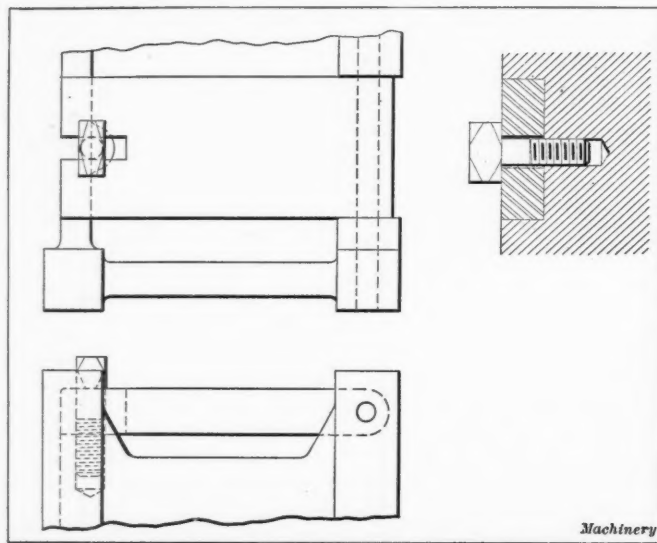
Jig Cover locked by Quarter Turn Screw Buckle
